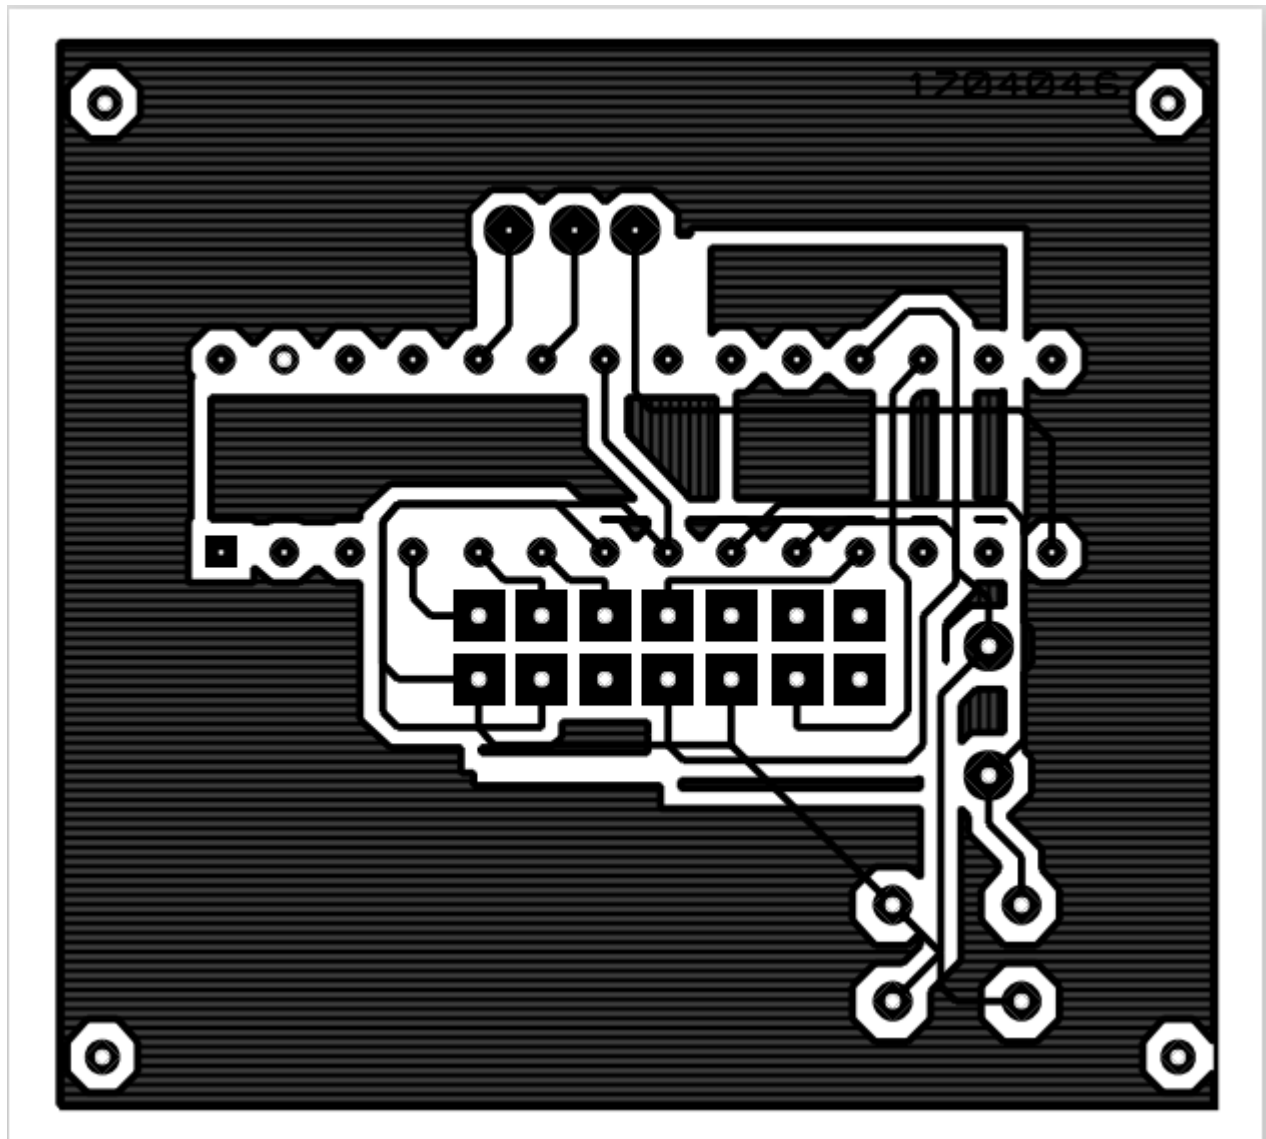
The PCB Design for automatic light controller with bidirectional visitor counter
